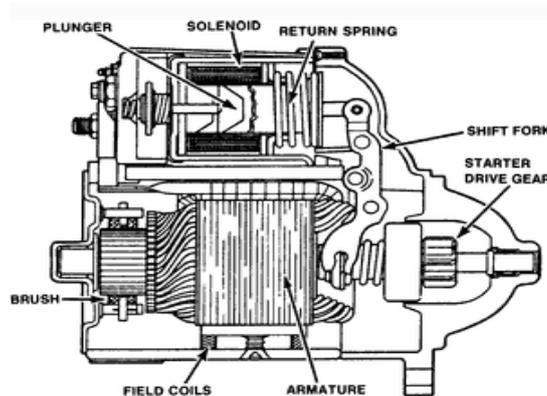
a: Starter-motor coupled to a reciprocating engine (Courtesy: www.Google.co.in)
